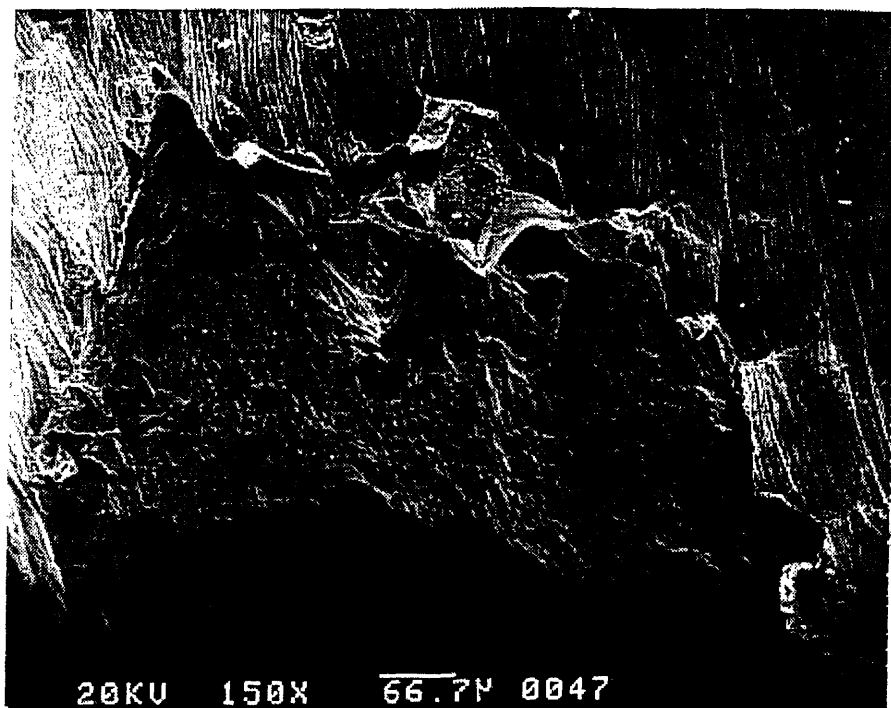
Side view of a shear ductile fracture surface on specimen 2003, furnace sensitized alloy 304.
